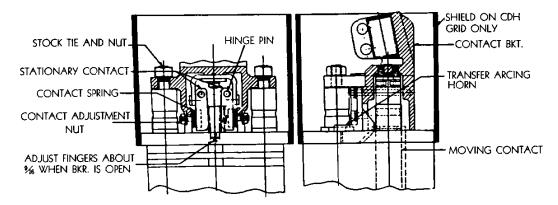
Typical Contact Assembly, with Finger Type Contact and De-ion Grid—Sectional View
